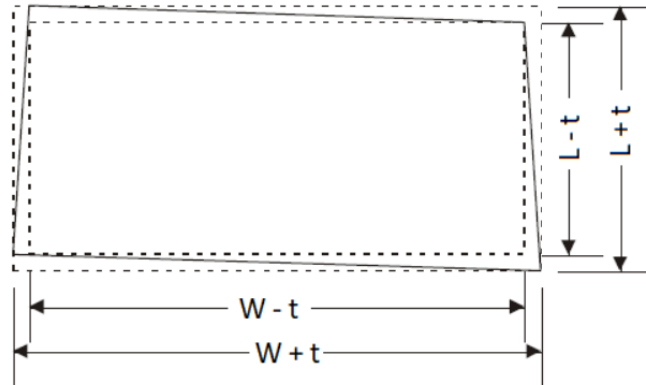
Dimensional tolerance limits for rectangular panes
